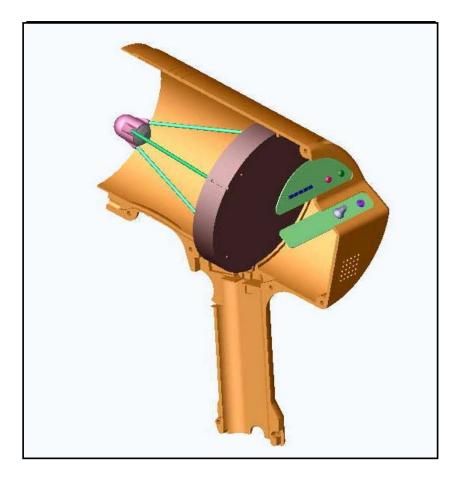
Cut-away view of the housing, transducer, parabolic dish and external display and controls. Battery will be located in the handle; electronics board behind the dish.
